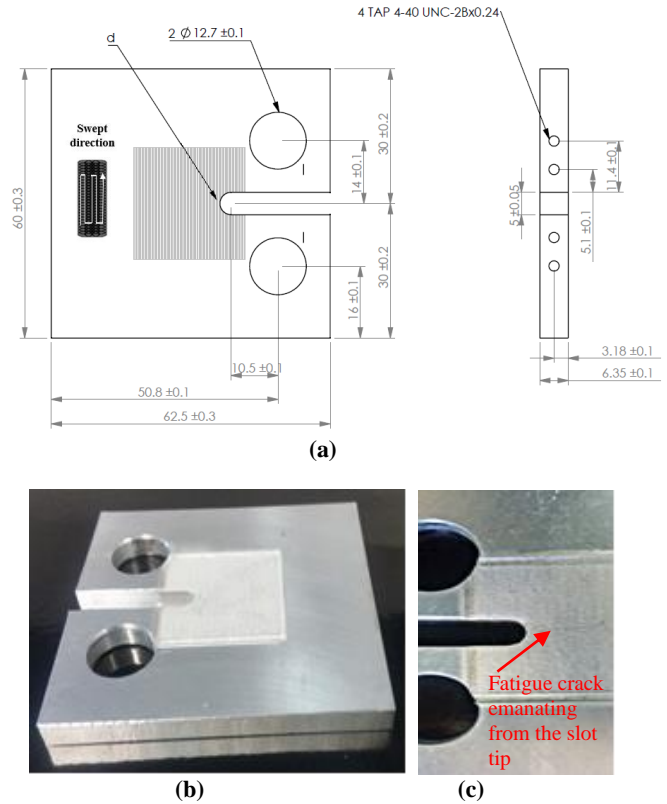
Compact tension test type specimens used in the fatigue crack initiation and growth tests. (a) Specimen geometry, dimensions in mm (b) Specimen with LSP (c) Initiation crack on tested specimen
